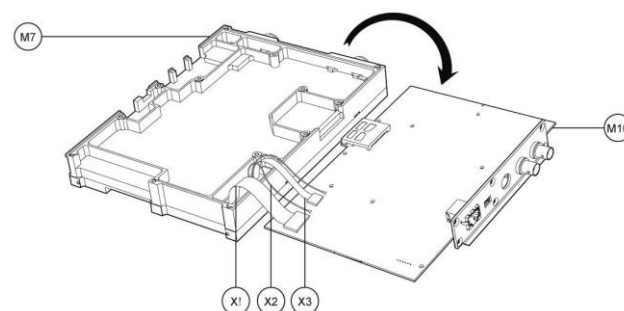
Replace Cable Flat 26P, Cable Flat 12P and Coax Cable
